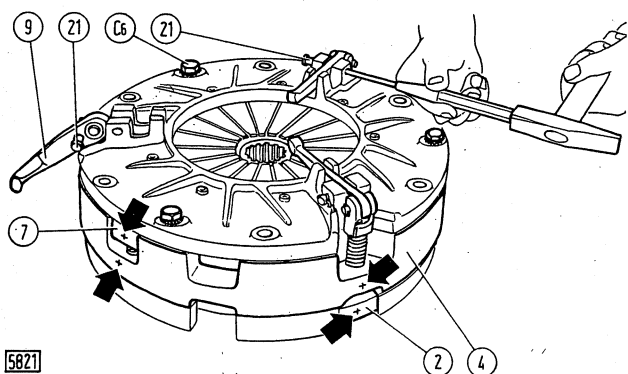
Removing the release levers (9) pivot pins (21) on the clutch cover.
